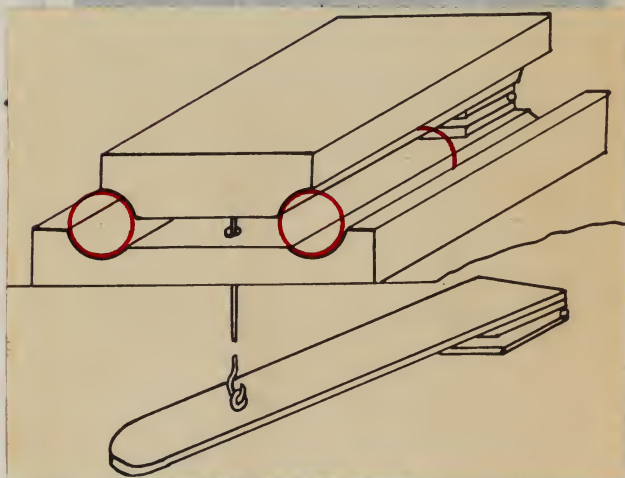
Foot Operated Fixture For Holding Cylindrical Components
